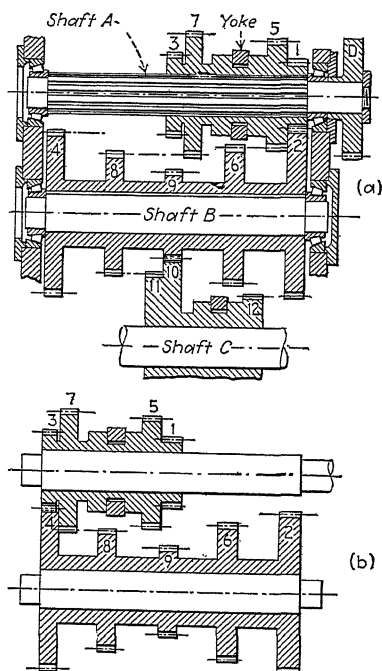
Sliding gears. The diagram is to show the method of obtaining four speeds of a driven shaft *B* by sliding a cluster of gears 1-5-7-3 to four positions. Gear *D* drives the multiple-splined shaft on which is the gear cluster. In the position shown in *a*, gear 1 engages gear 2 and gives the slowest speed because 1 is the smallest driving gear and 2 is the largest driven gear. In *b* is shown the position of the sliding gears for the next faster speed, with gear 3 engaging gear 4. Similarly if the cluster is moved to engage gear 5 with gear 6 the speed will be still faster, and when the gears are moved to engage 7 and 8, the fastest of the four speeds is obtained.
